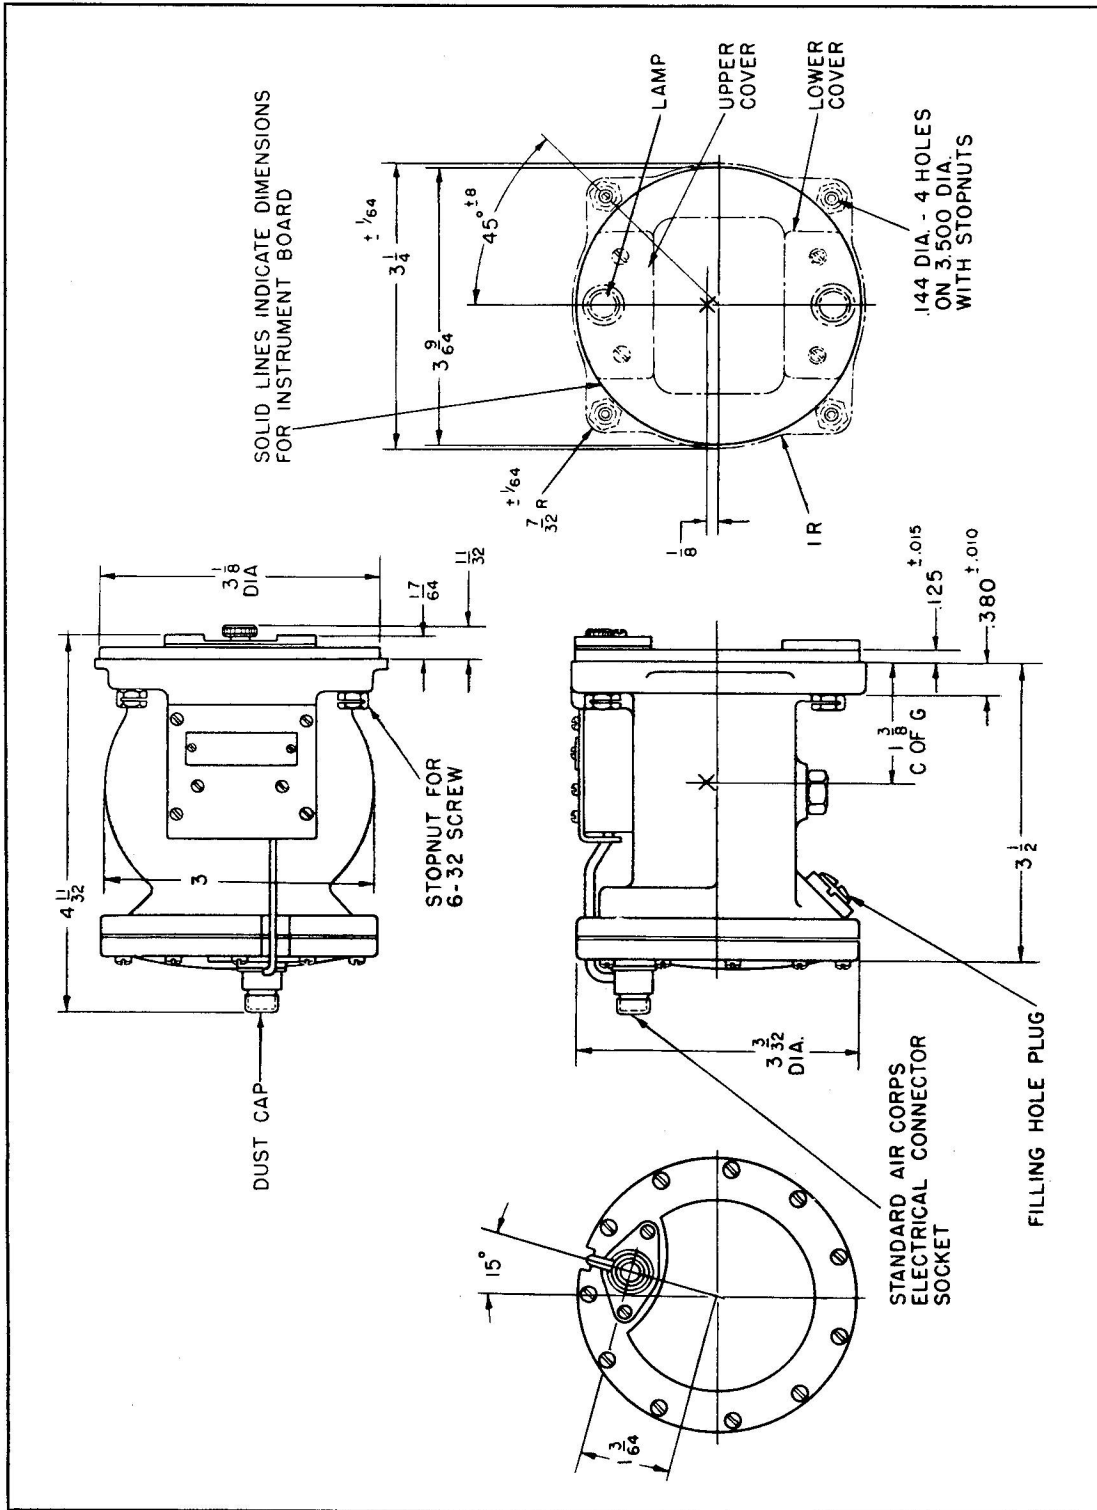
Dimensional Drawing - Type B-16 (Pioneer Types 1818-1-A and 1818-4-A)
